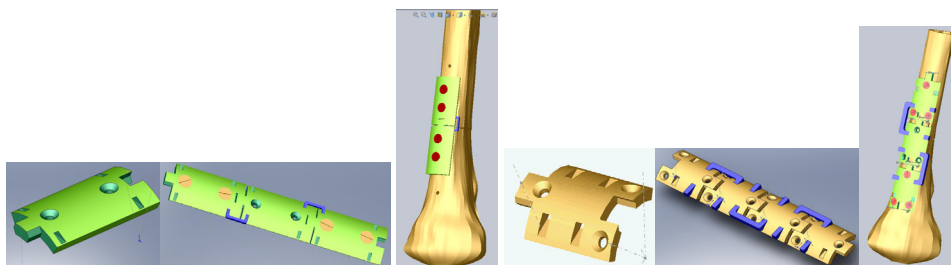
Modules, plates and tibia-modular plate assembly for diaphyseal fractures
